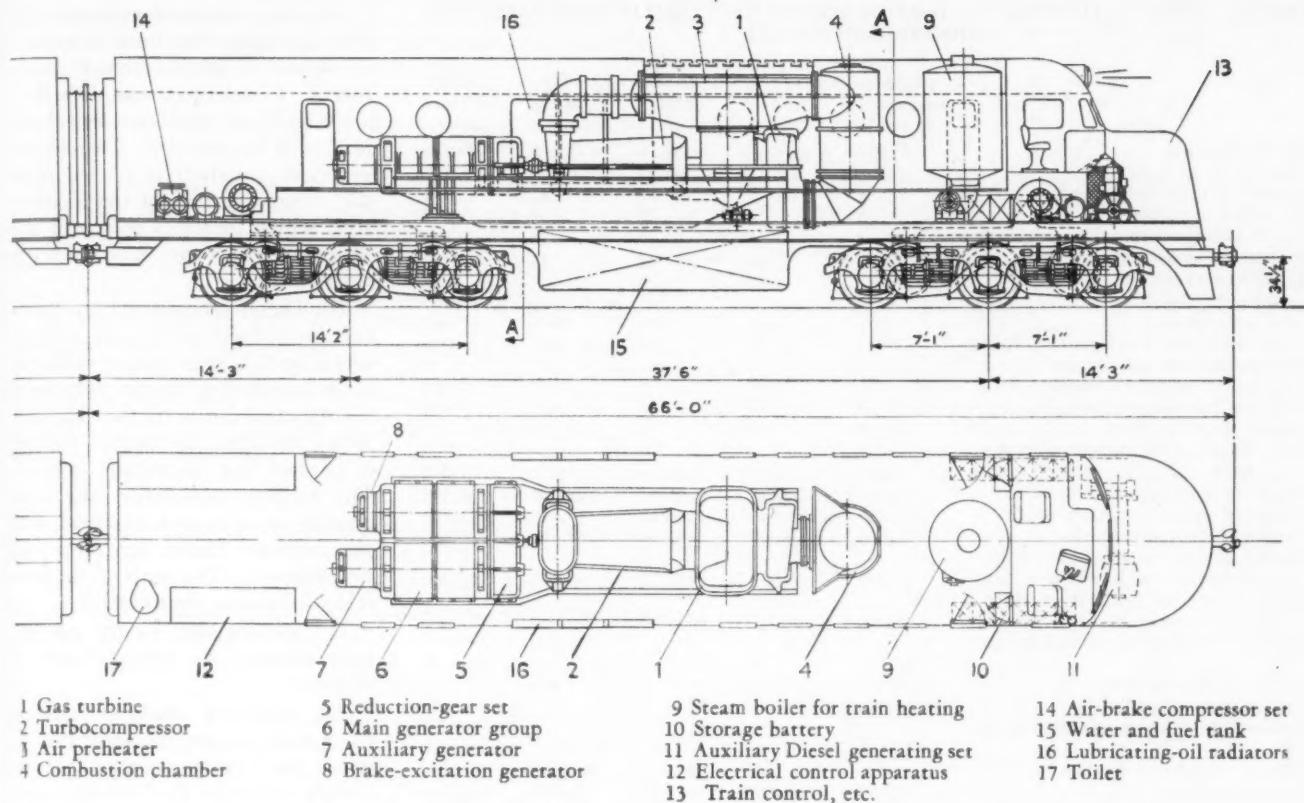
2500-hp END UNIT OF 7500-hp LOCOMOTIVE OF FIG. 3
